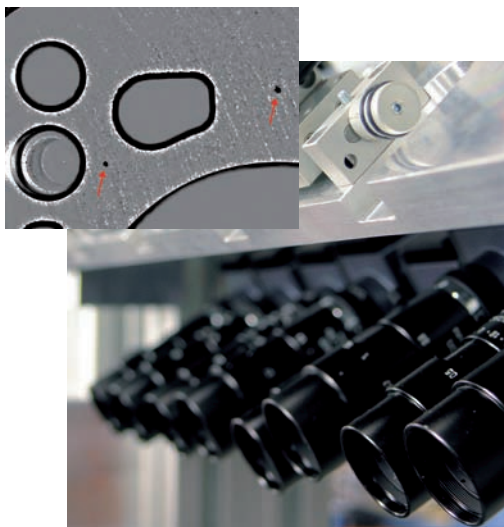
Inspection of a cast-aluminum component sealing surface: With the help of a special illumination technique the two deficiencies marked by the arrows are clearly visible.
